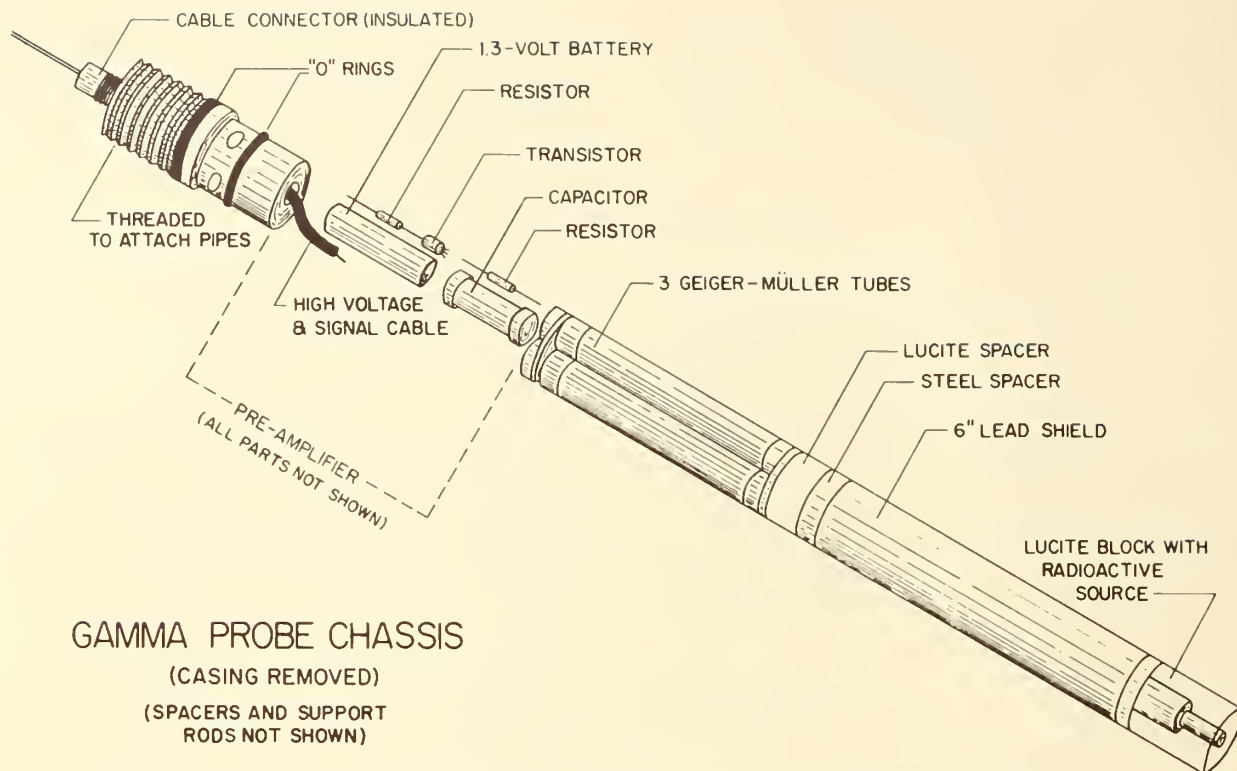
Drawing of gamma probe chassis showing arrangement of internal components.
